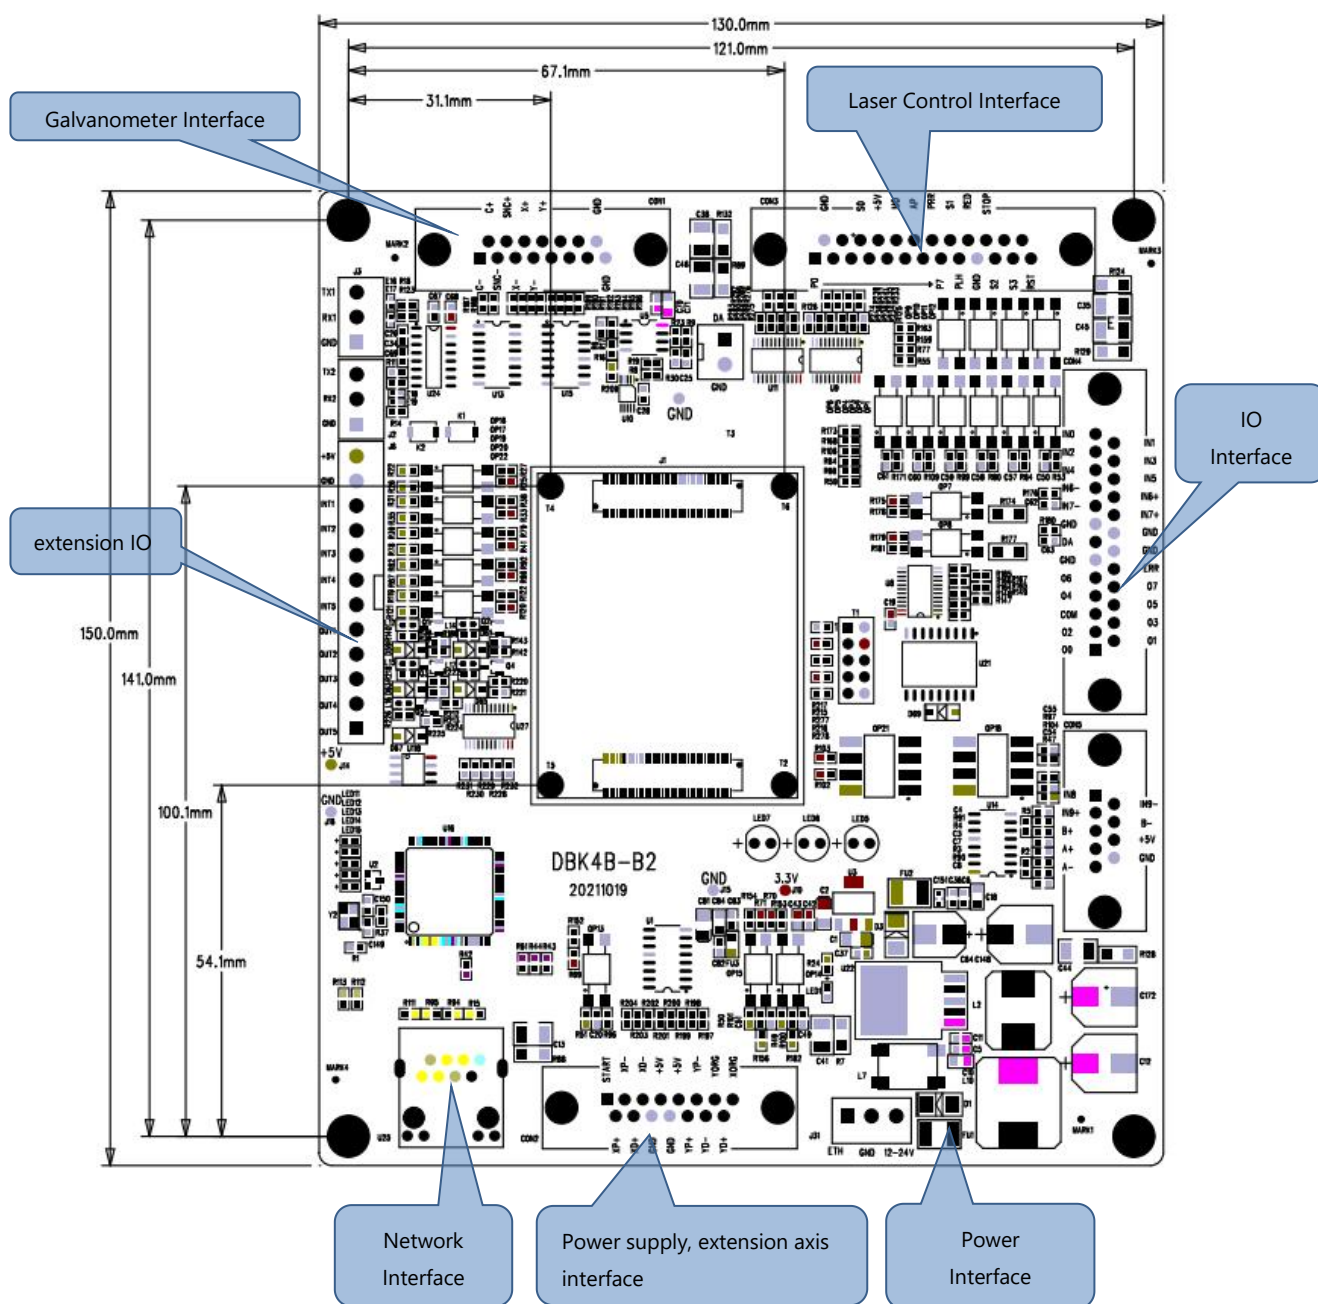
DBK4B-B4 Control Card External Dimension Drawing
